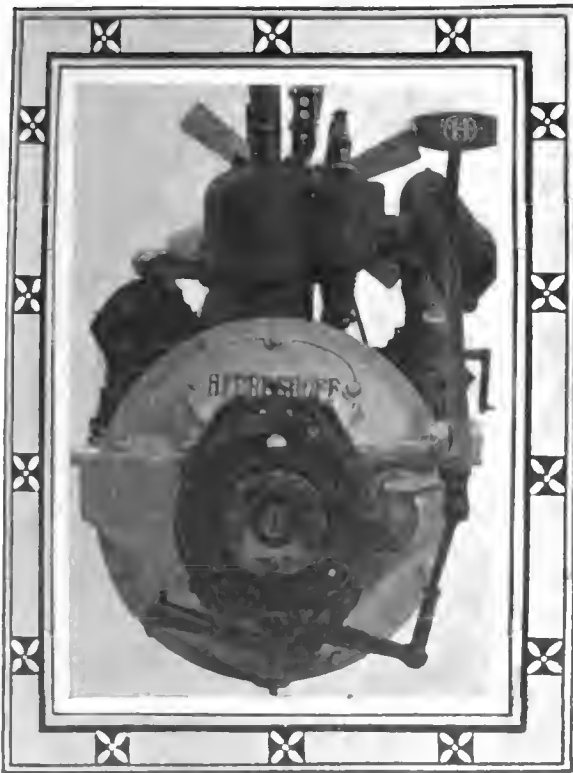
Rear end view of the motor looking into the flywheel, showing details of the connections for the clutch
